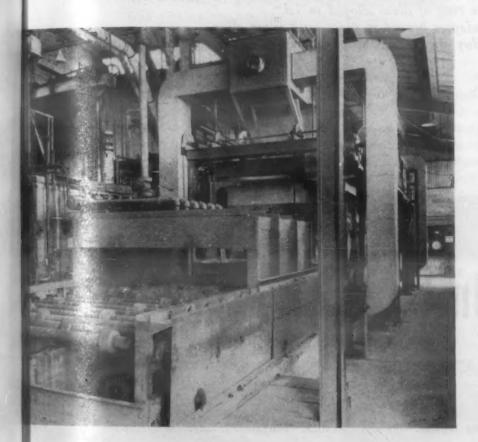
Discharge end showing quench of the same furnace in Fig. 2.
